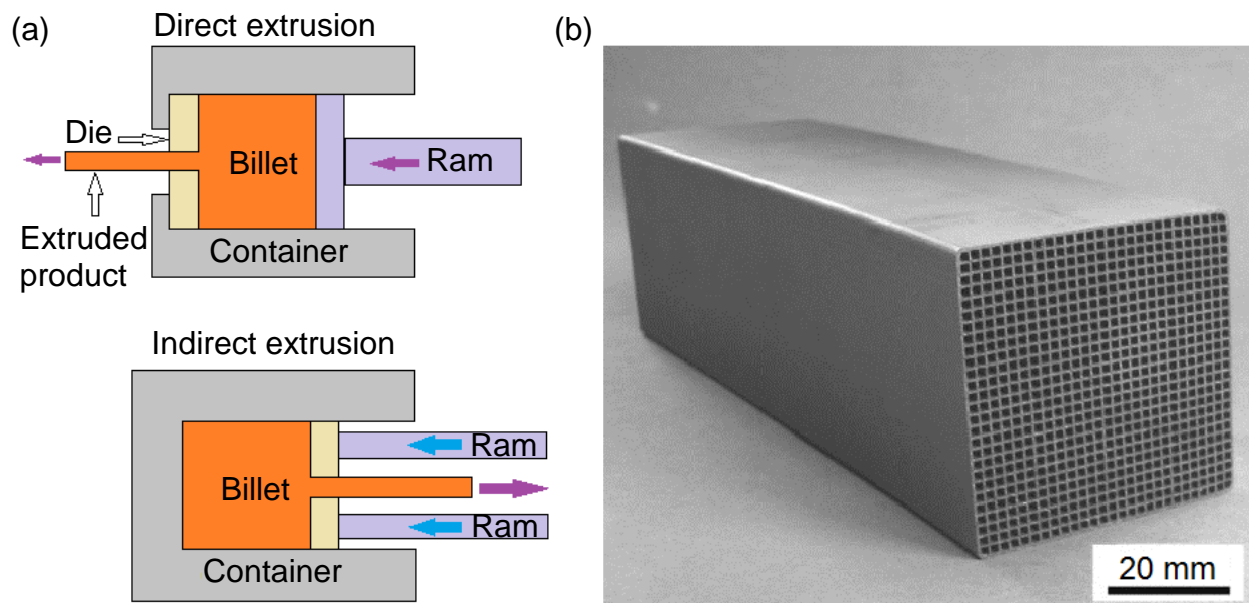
(a) A schematic of the extrusion process and (b) a honeycomb structure produced using the process [2].
